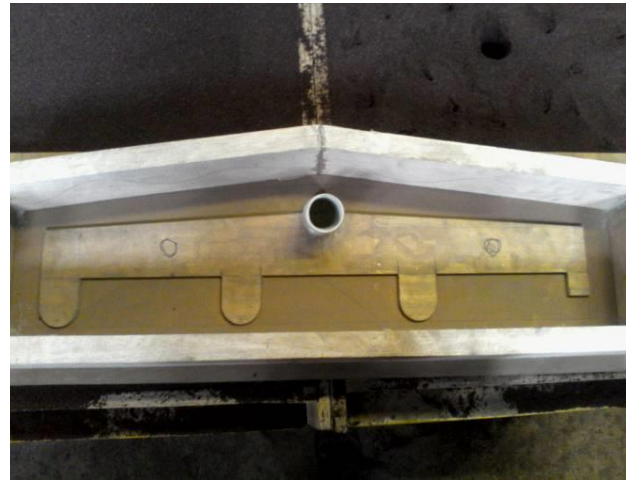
3 Blade Planter Mould and Metal Cast Prototypes
